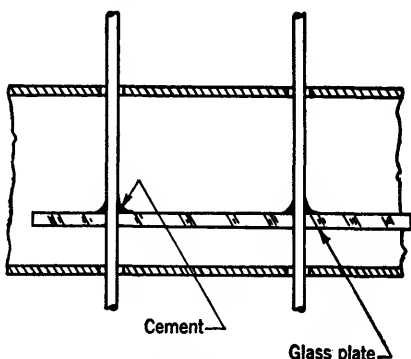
Cement mounting of glass plate in waveguide.
